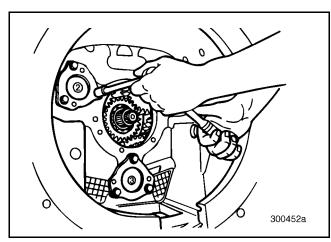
Removing No. 2 Front Countershaft Front Bearing Cover Capscrews
